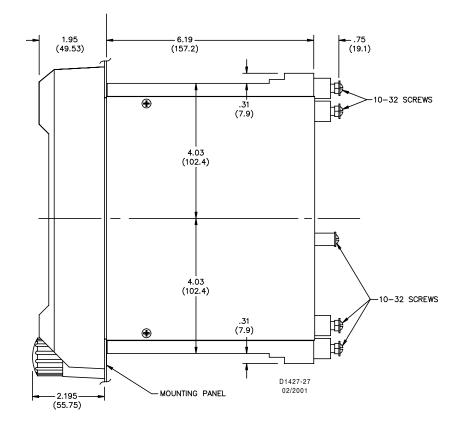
S1 Case, Double-Ended, Semi-Flush Mounting, Outline Dimensions, Side View
